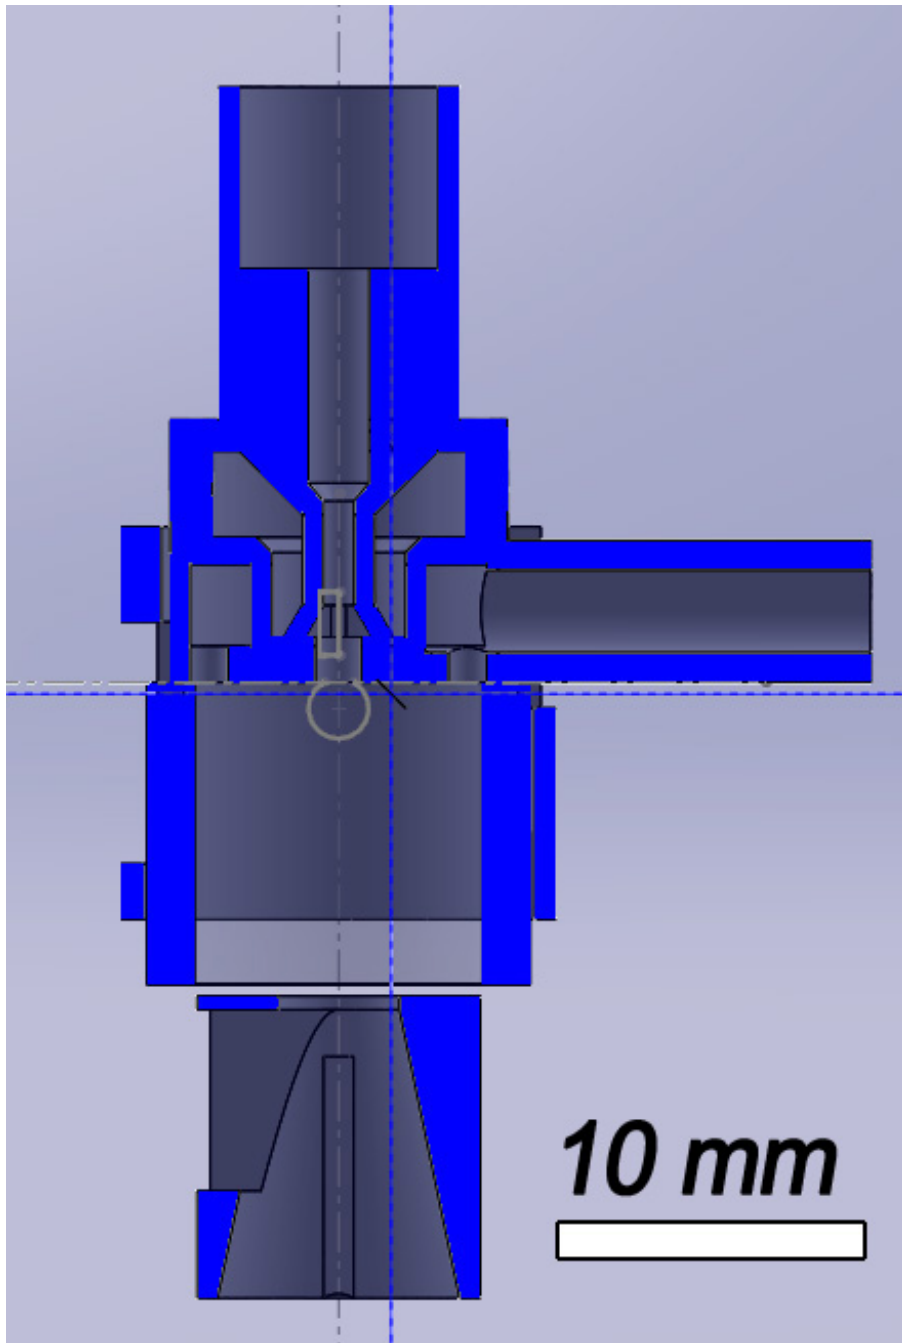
Cross section view of Nozzle 2 CAD model.
